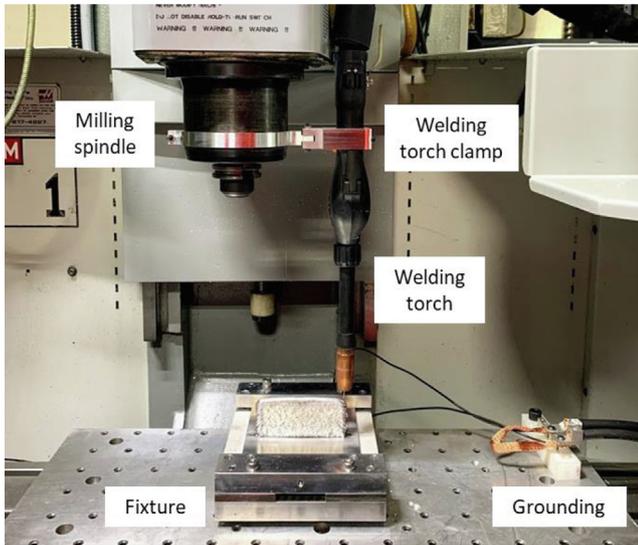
Low-cost WAAM setup with a Miller 350P GMAW torch clamped to the Haas TM-1 CNC milling machine spindle and limited-constraint fixture attached to the machine table.
